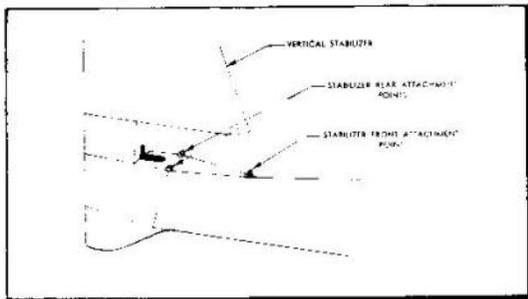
Horizontal Stabilizer Attachment Points on Fuselage
